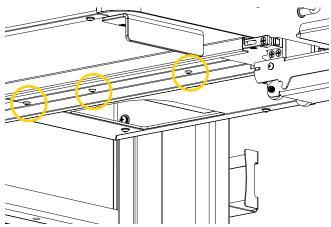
Tightening the screws on the right-hand side of the 2-part sliding mechanism (1 of 2)
